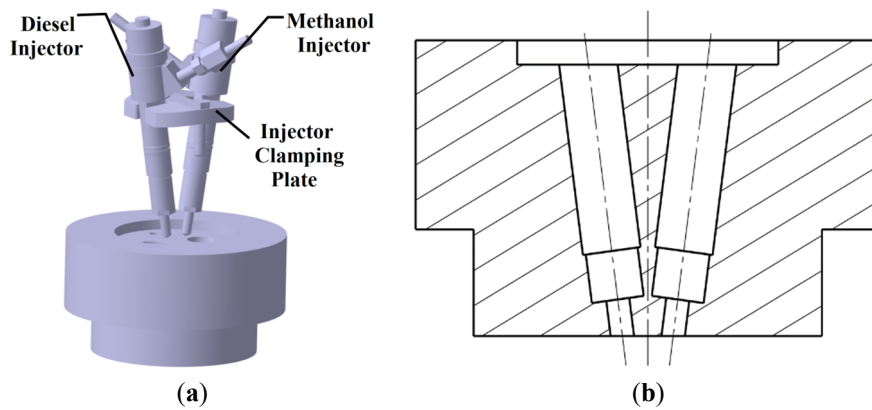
(a) Injector arrangement and (b) metal plug structure.
